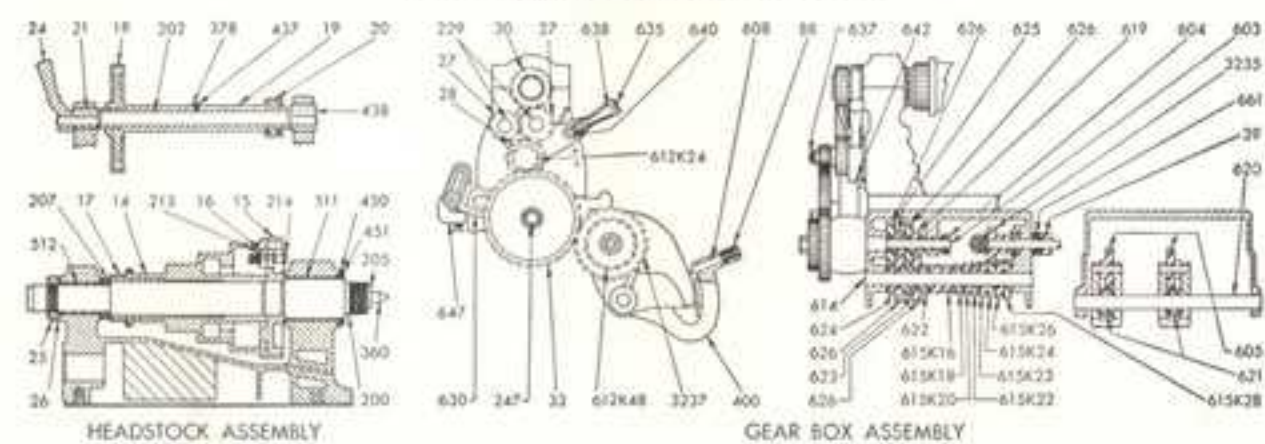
Principal Parts of a South Bend Underneath Motor Drive Lathe
